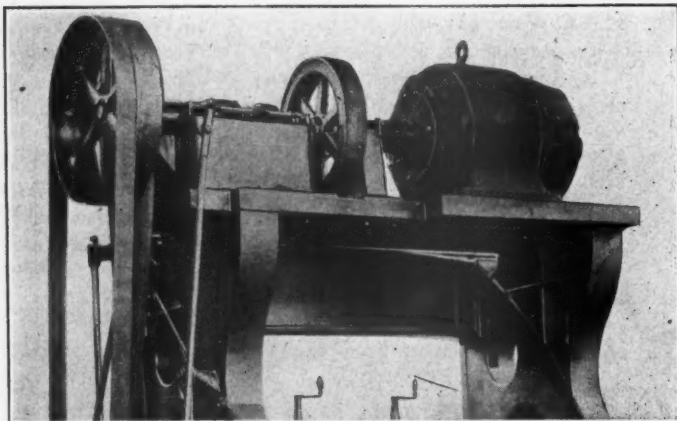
REAR VIEW OF THE GEARED DRIVE UPON THE CINCINNATI PLANER, SHOWING GEAR BOX, AND ALSO THE HEAVY FLYWHEEL.
